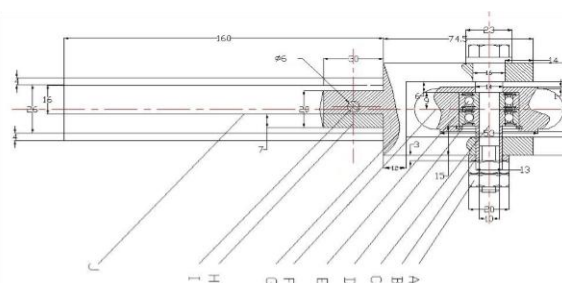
General View Of Main Components Of Roller Burnishing Tool
